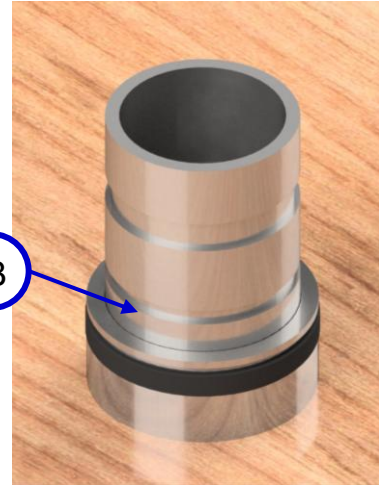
The seal is trapezoidal in shape. The larger diameter should be on the bottom.
